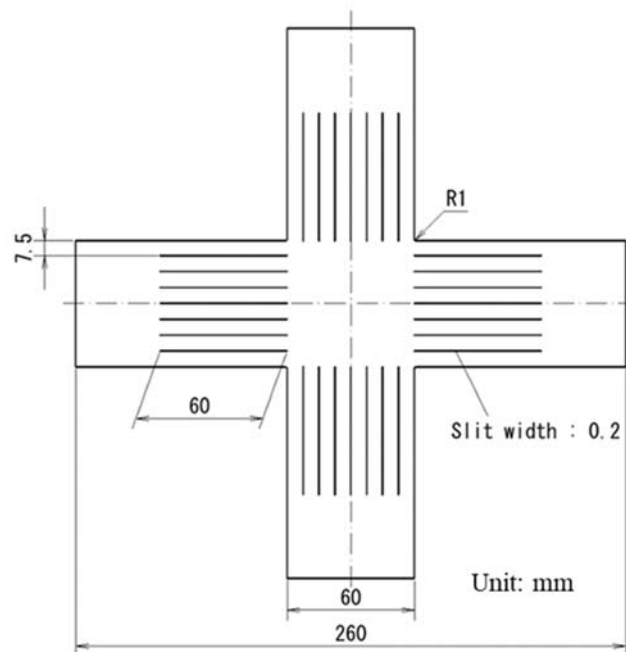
Geometry of cruciform specimen used for biaxial tensile test (Kuwabara et al., 1998)
